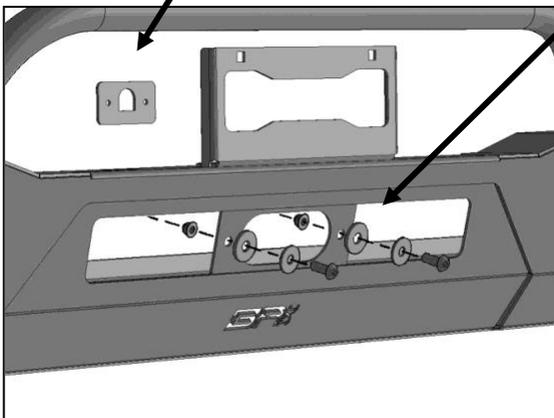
Models with winch, attach cable guide Bracket to inside of Bumper
